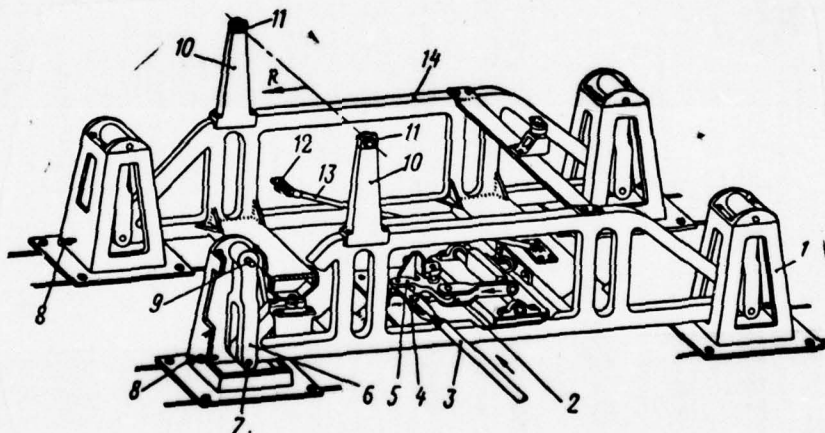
Machine tool with suspension platform on connecting rods. 1 - the buck stays, 2 - branching/fork, 3 and 4 - thrust/rod, 5 -
